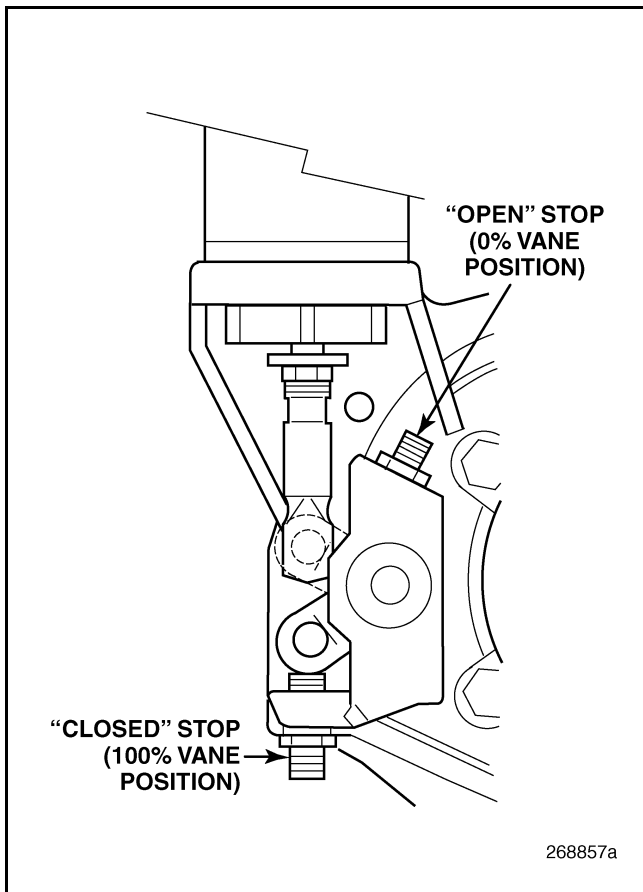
Rod End-to-Lever Arm Clevis Alignment
